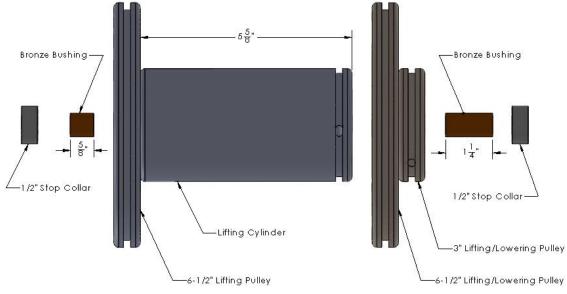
T - Cam-cylinders Configuration for TDL (right side view)
